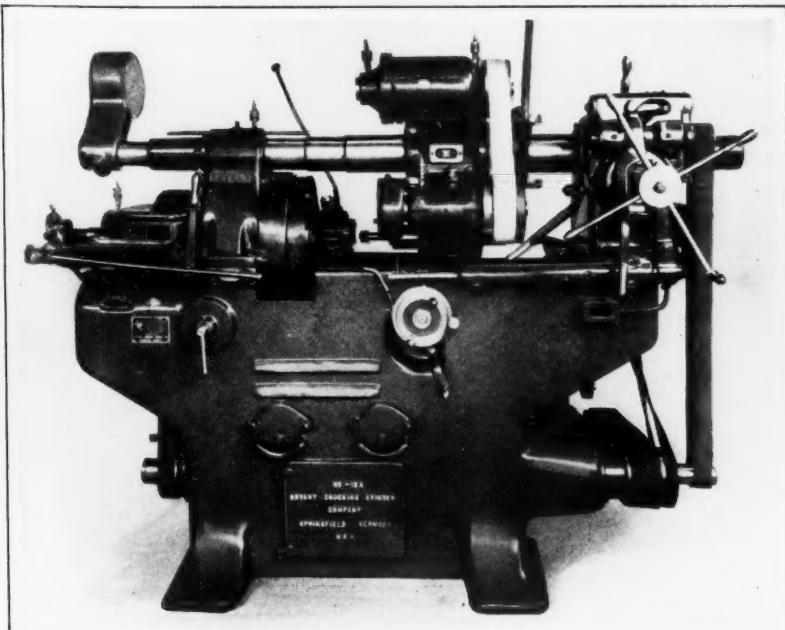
Bryant Grinding Machine Having Two Wheel-spindles for Grinding Bores, Faces, and Outside Diameters at One Chucking of the Work
